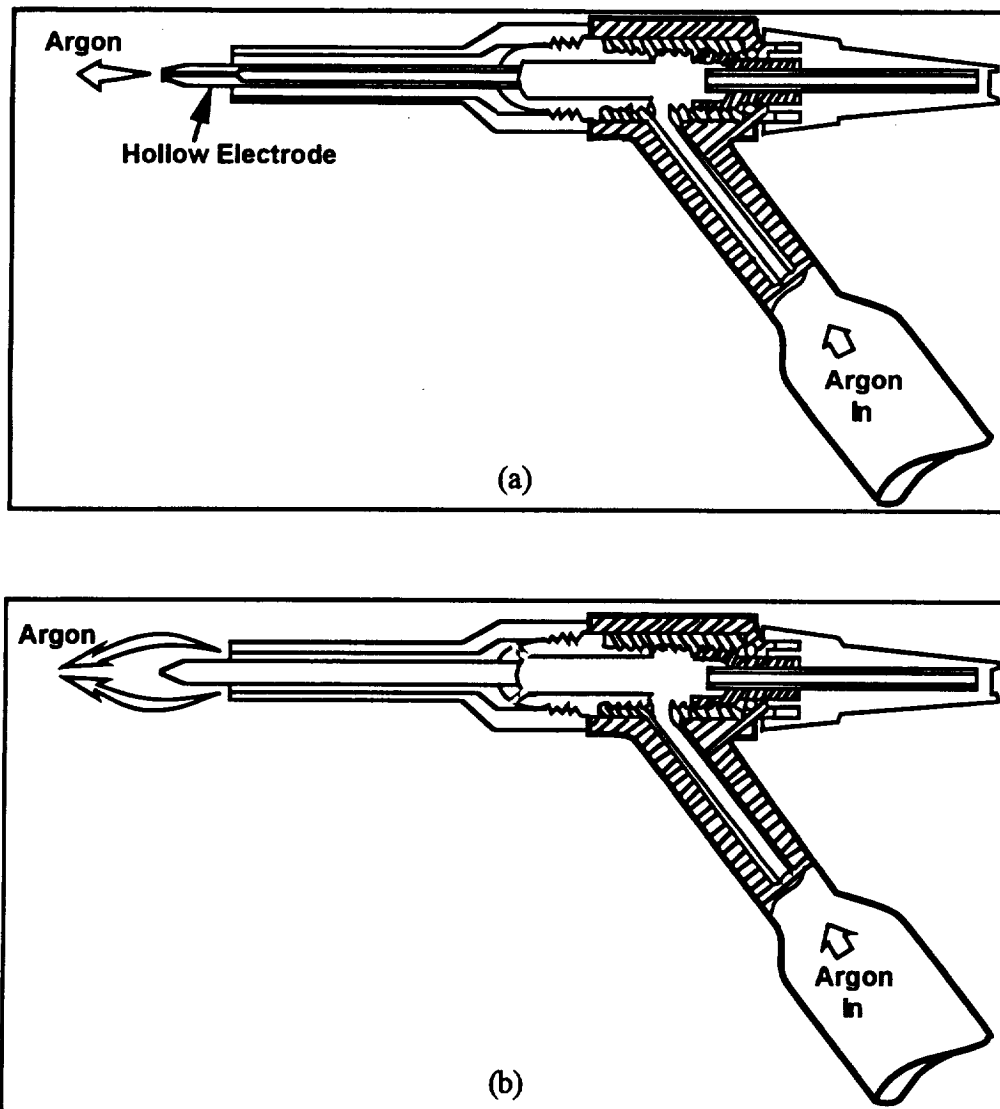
Vacuum (a) and Conventional (b) GTAW Torches
